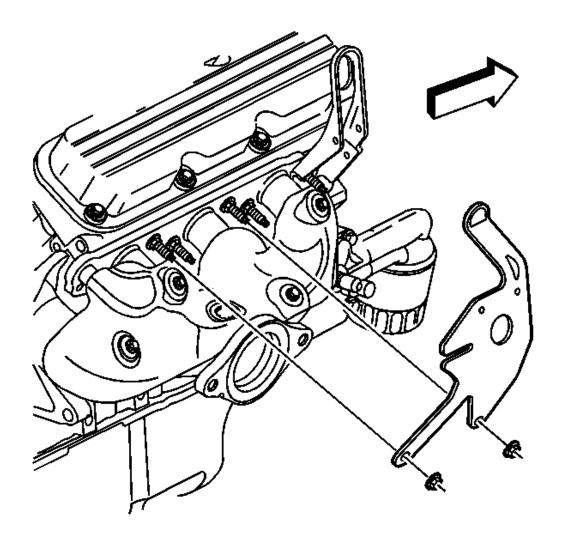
Right Exhaust Manifold Gasket Courtesy of GENERAL MOTORS CORP.
